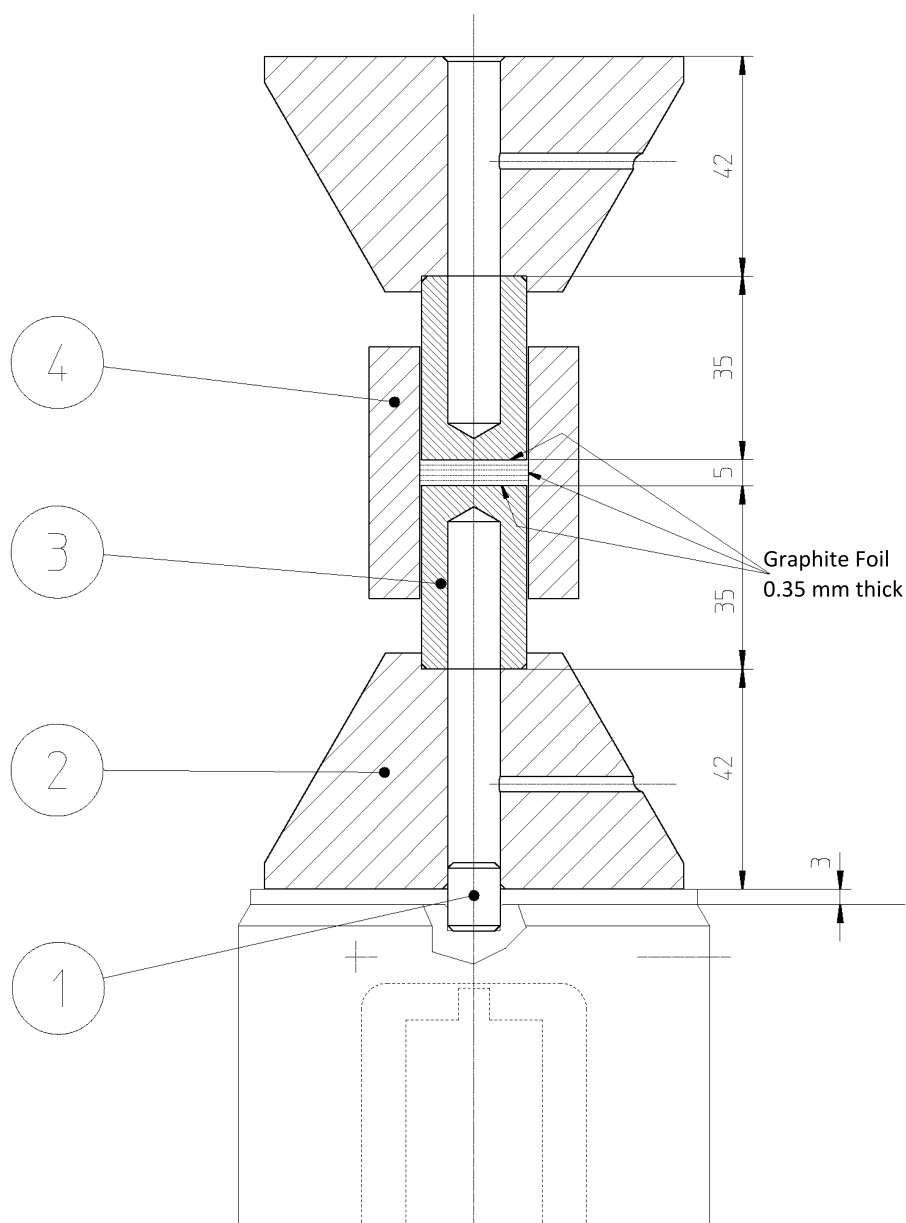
Technical drawing showing the dimensions of the components of the 20 mm diameter all-graphite FAST mould assembly.
